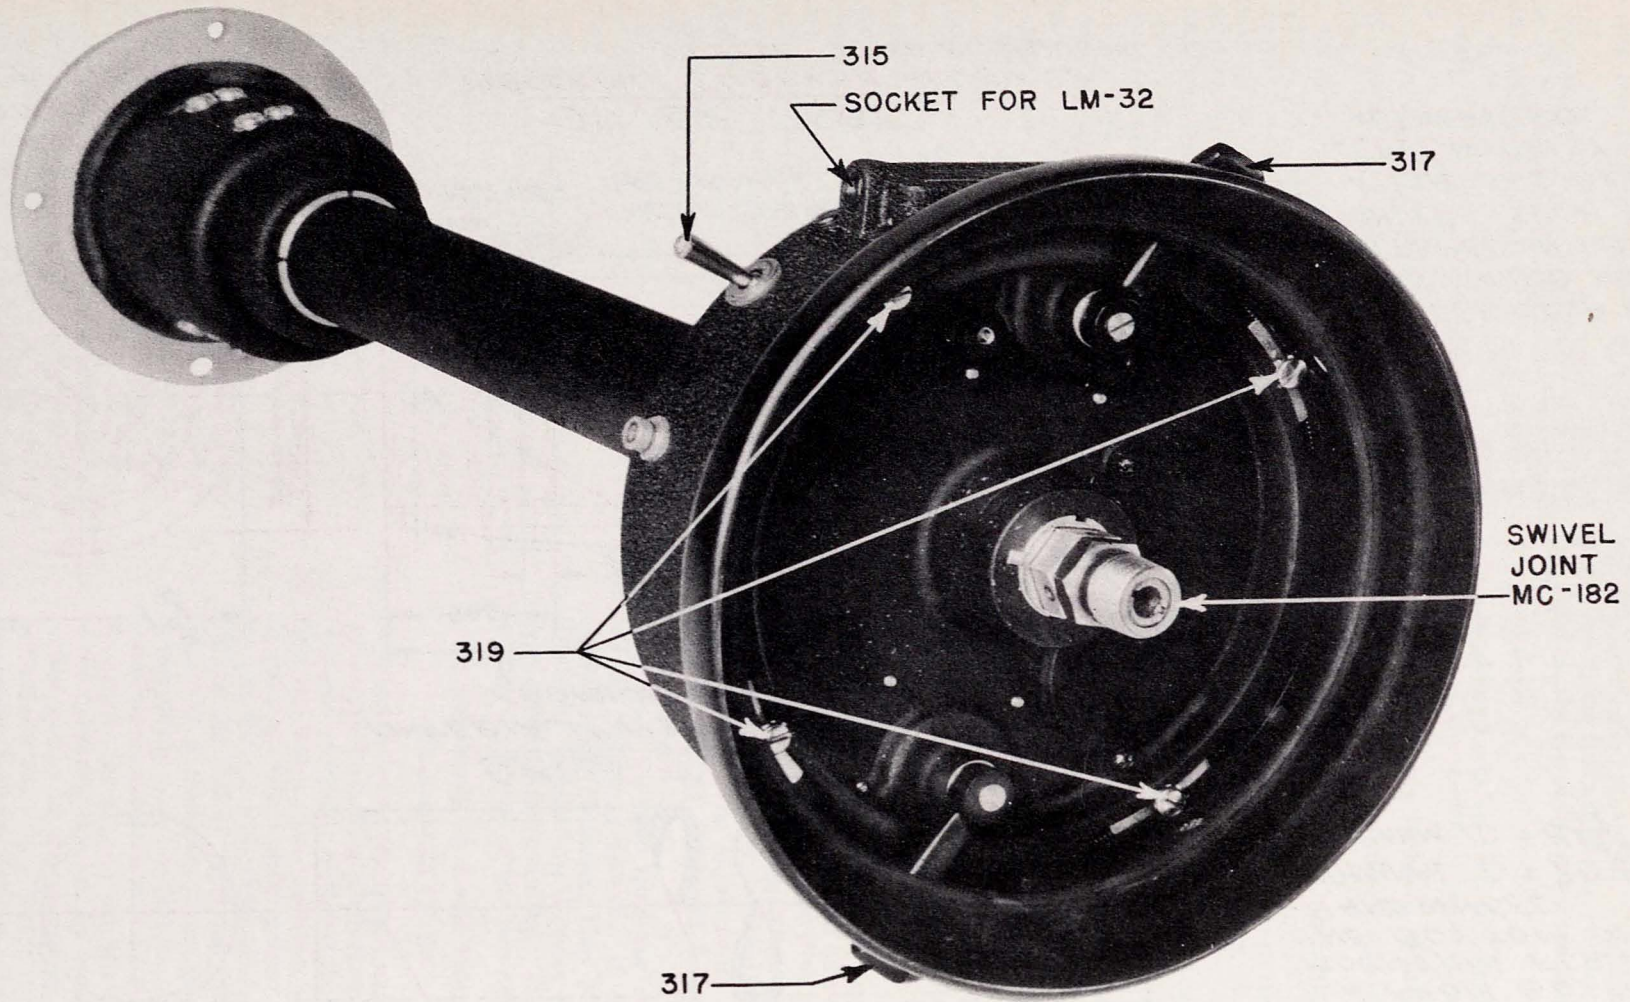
LOOP MOUNTING GS-8-B, BASE
